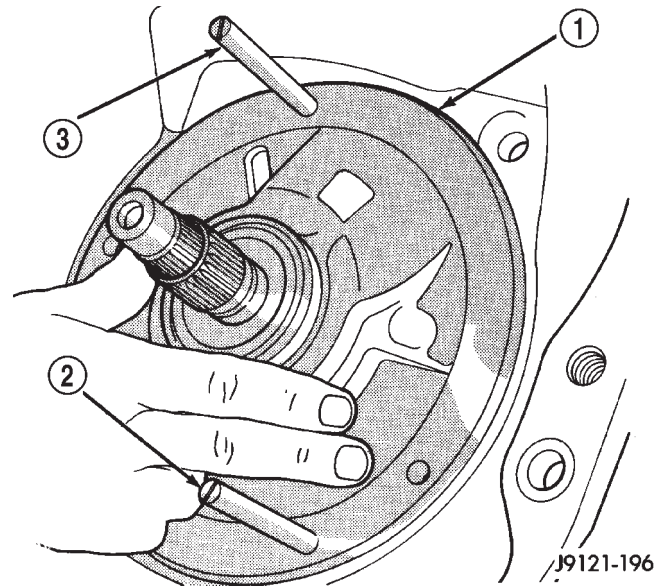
Installing Oil Pump And Reaction Shaft Support
